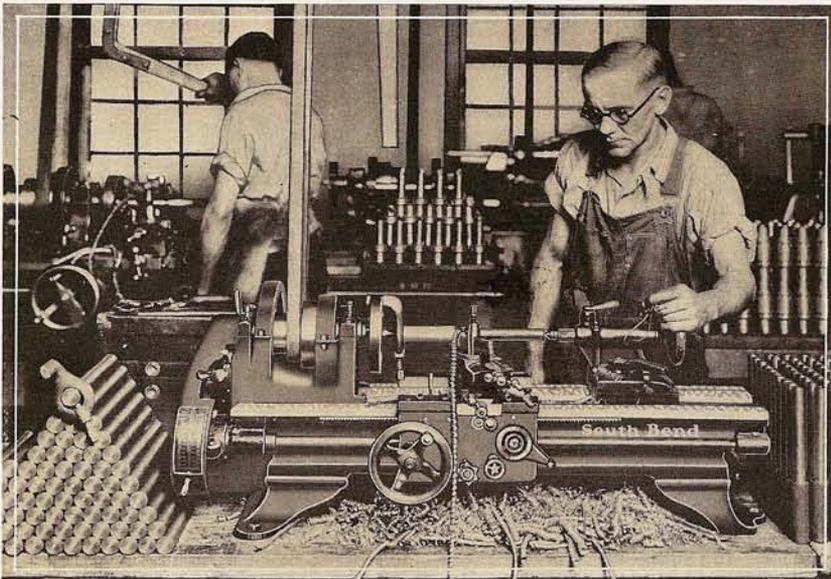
The 9-inch New Model Lathe on a Production Job in a Manufacturing Plant
